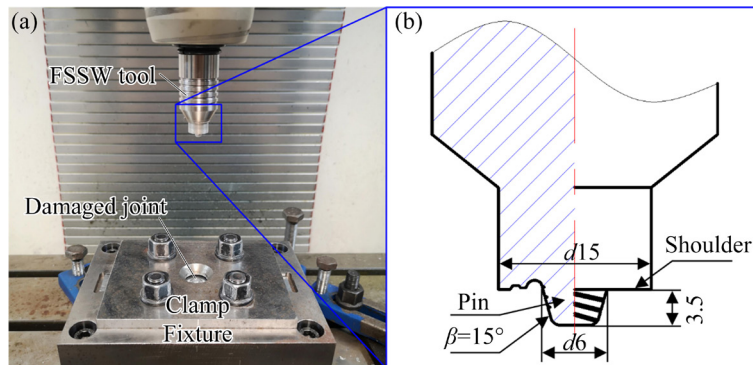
FSSW equipment (a) and FSSW tool configuration and its dimensions (b) (unit: mm)
